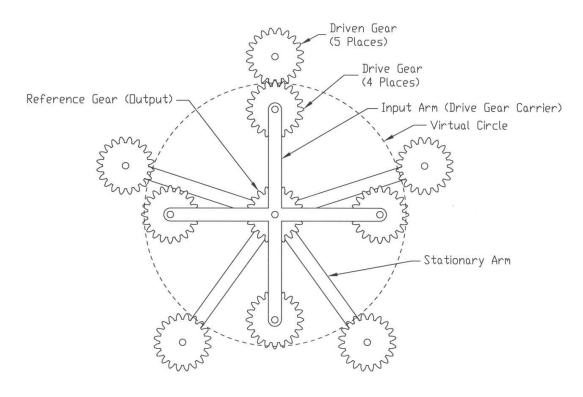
Embodiment with Vernier Relationship Between Drive and Driven Gears
